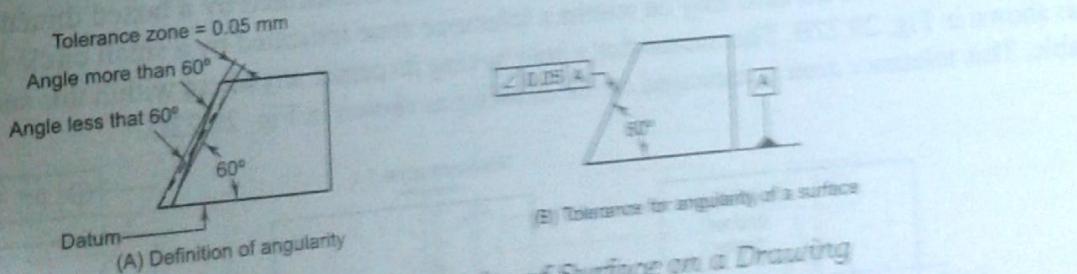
Indicating Angularity of Surface on a Drawing
